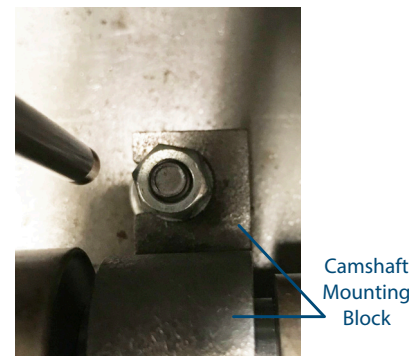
Clearance from the camshaft mounting block once removal of strainer assembly is complete.
